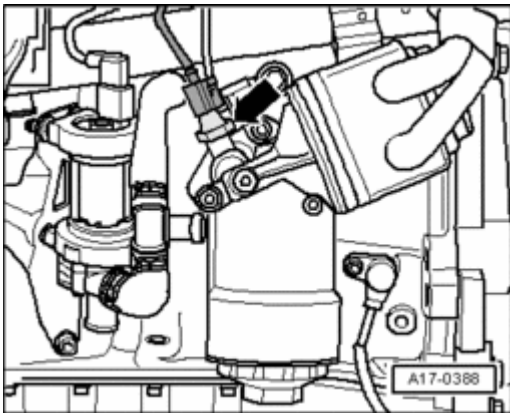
Disconnecting Electrical Connector At Oil Pressure Switch Using Assembly Tool T10118
